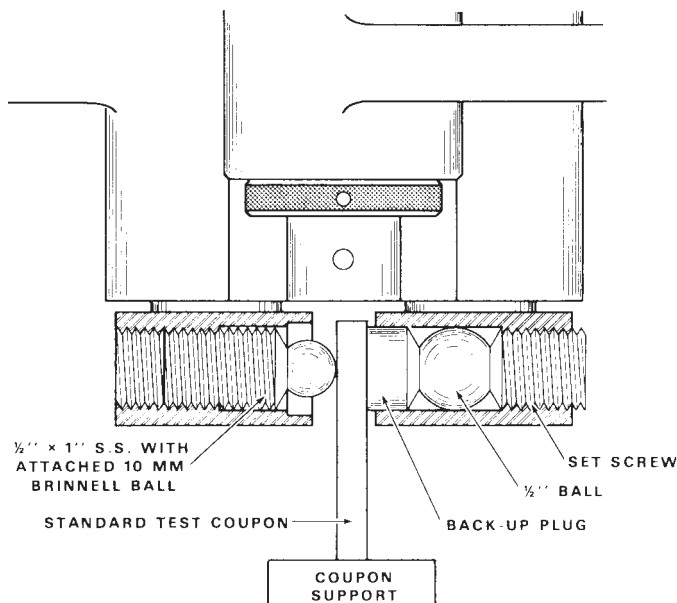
Schematic Drawing of Calibration Accessories for Falex Pin and Vee Block Test Machines
